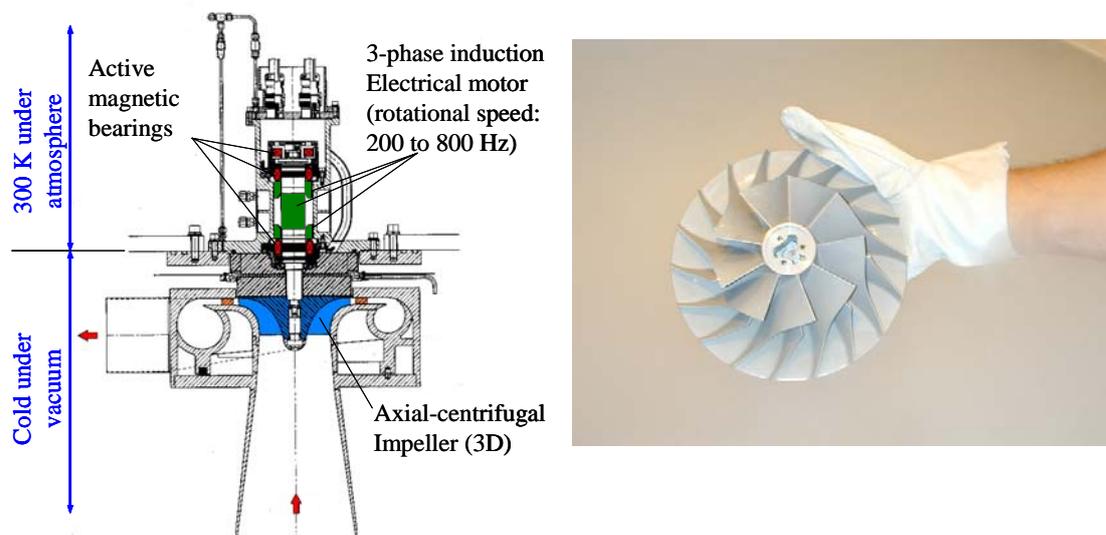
Typical cross section and 3D axial-centrifugal impeller of a cold compressor
